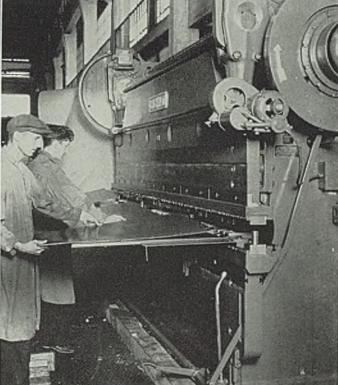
(Upper left)—A 12-foot press brake multiple punching and forming freight-car side stakes of 3/8-inch mild steel at two working stations. Fig. 2. (Top page 1)—This unit with gaging table and fixed center punches makes the holes in four sides of 1/8-inch steel plates prior to flanging in Fig. 3 (upper right) which assures proper bolthole alignment. Fig. 4. (Lower left)-End view of adjustable punches, dies and stripper plate fingers. Many tool combinations are possible. Fig. 5. (Lower right)—Progressive 3-station setup for multiple punching and forming refrigerator cabinets—three operations at one handling of the material
